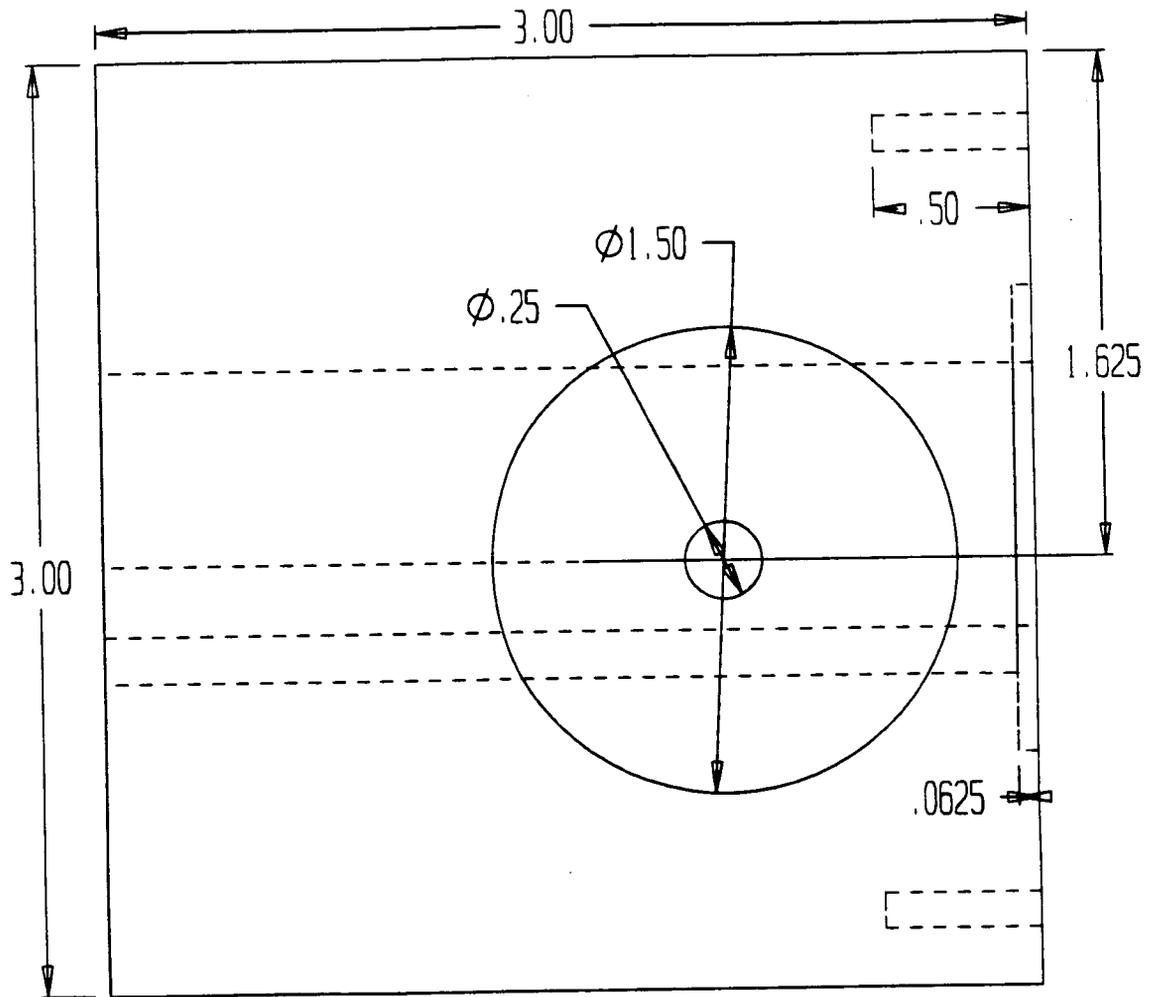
Segment 2 - Machine Drawing - Bottom View
